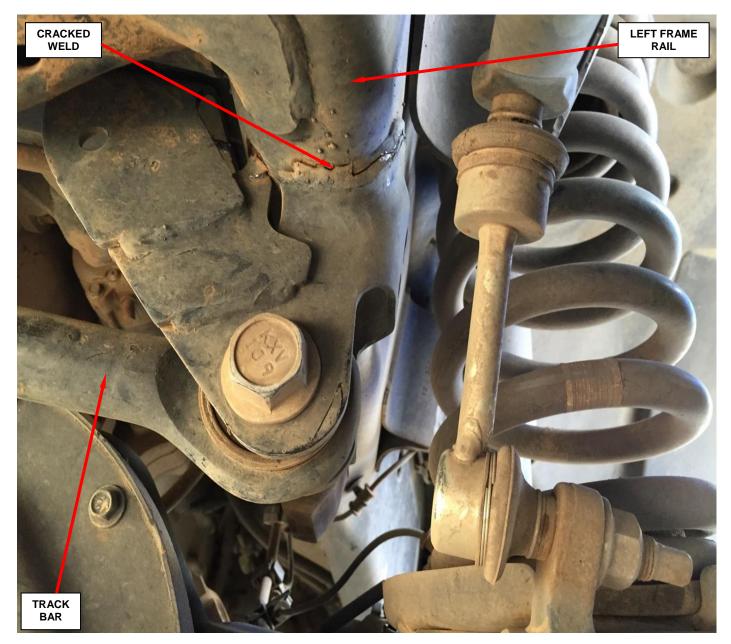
Example of a Cracked Track Bar Bracket Weld
